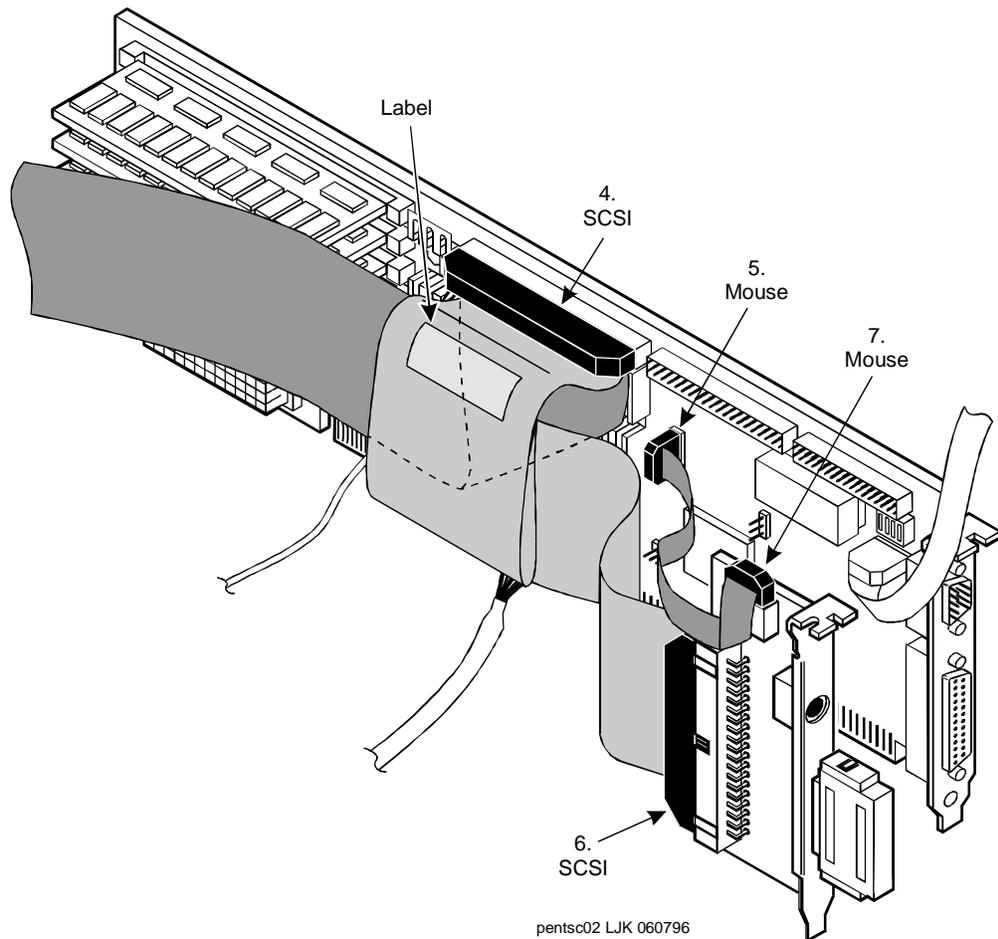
Attaching Cables to the P575/CPU Circuit Card - Part 2
